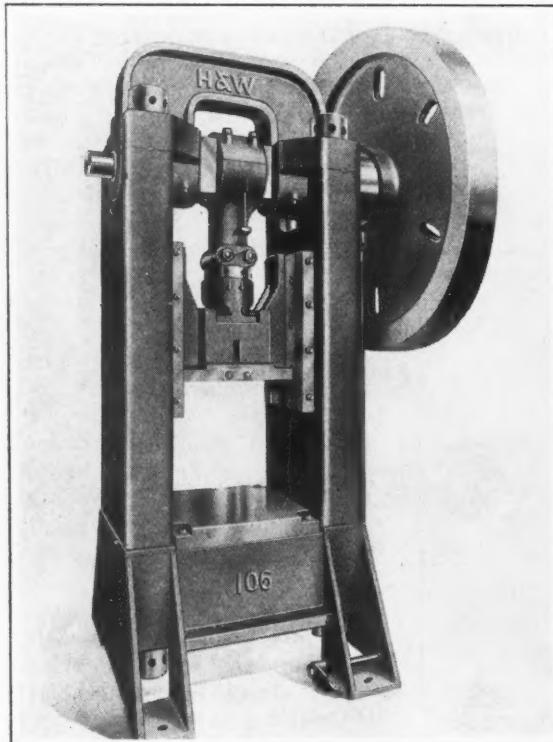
Henry & Wright Straight-sided Press of All-steel Welded Construction
